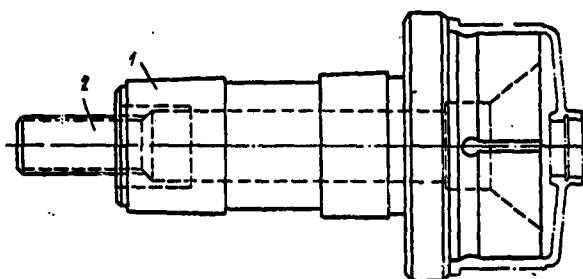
Mandrel for outside machining of housing and thread cutting. 1) Mandrel; 2) rod.
